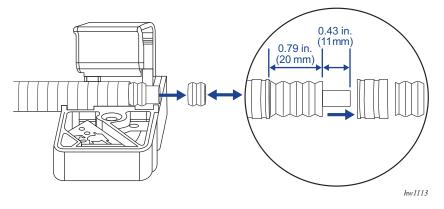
Rotating the LDF4 Cable Strip Tool Around the Cable
